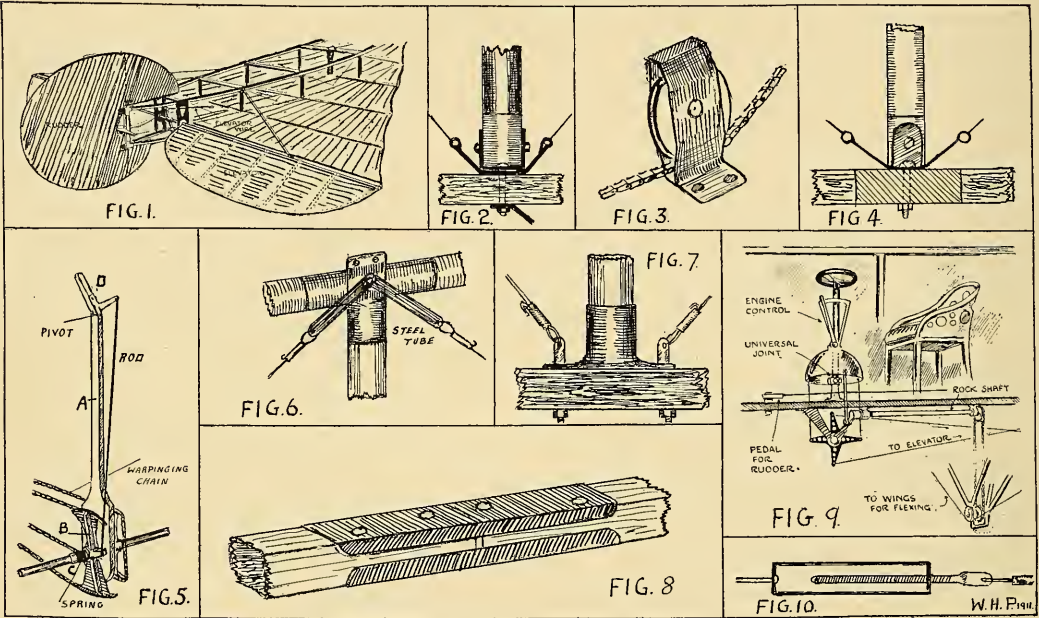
Shows the general construction of the pigeon tail and elevator on Moisant's two-seater Blériot.
